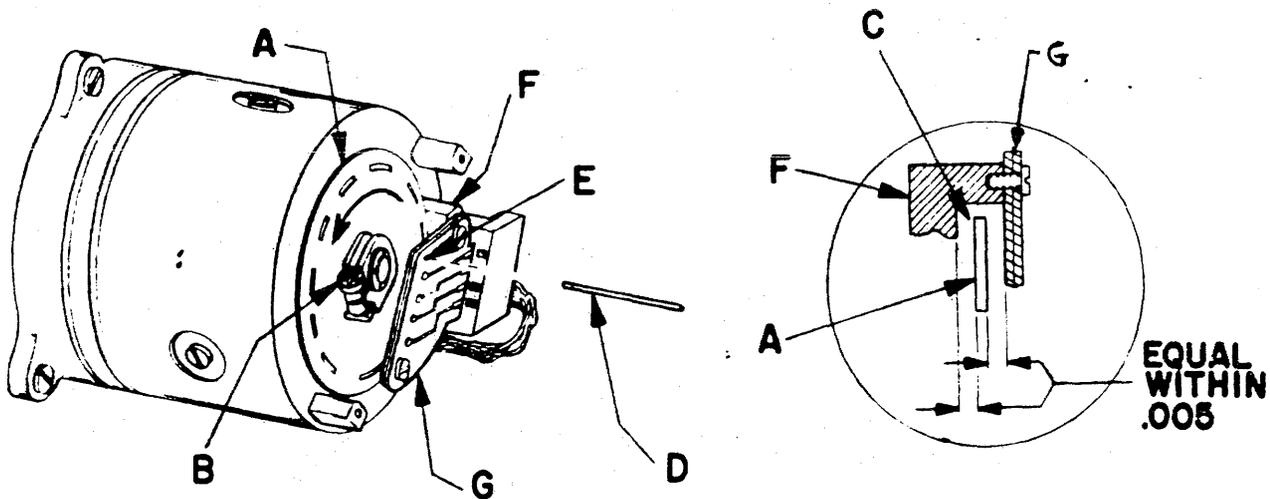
CARRIER POSITION READOUT ADJUSTMENT
